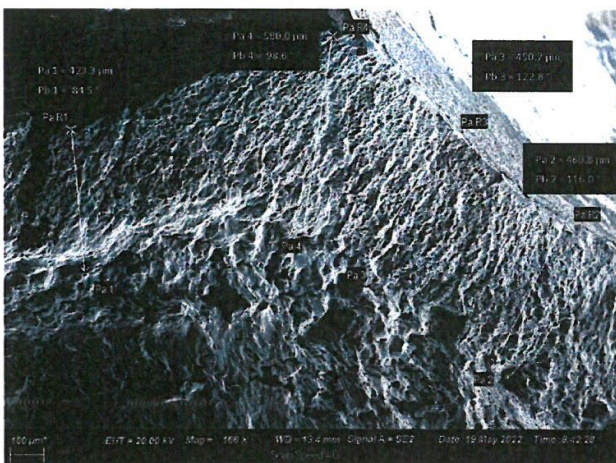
Fractured Crankshaft Gear (Digital)
